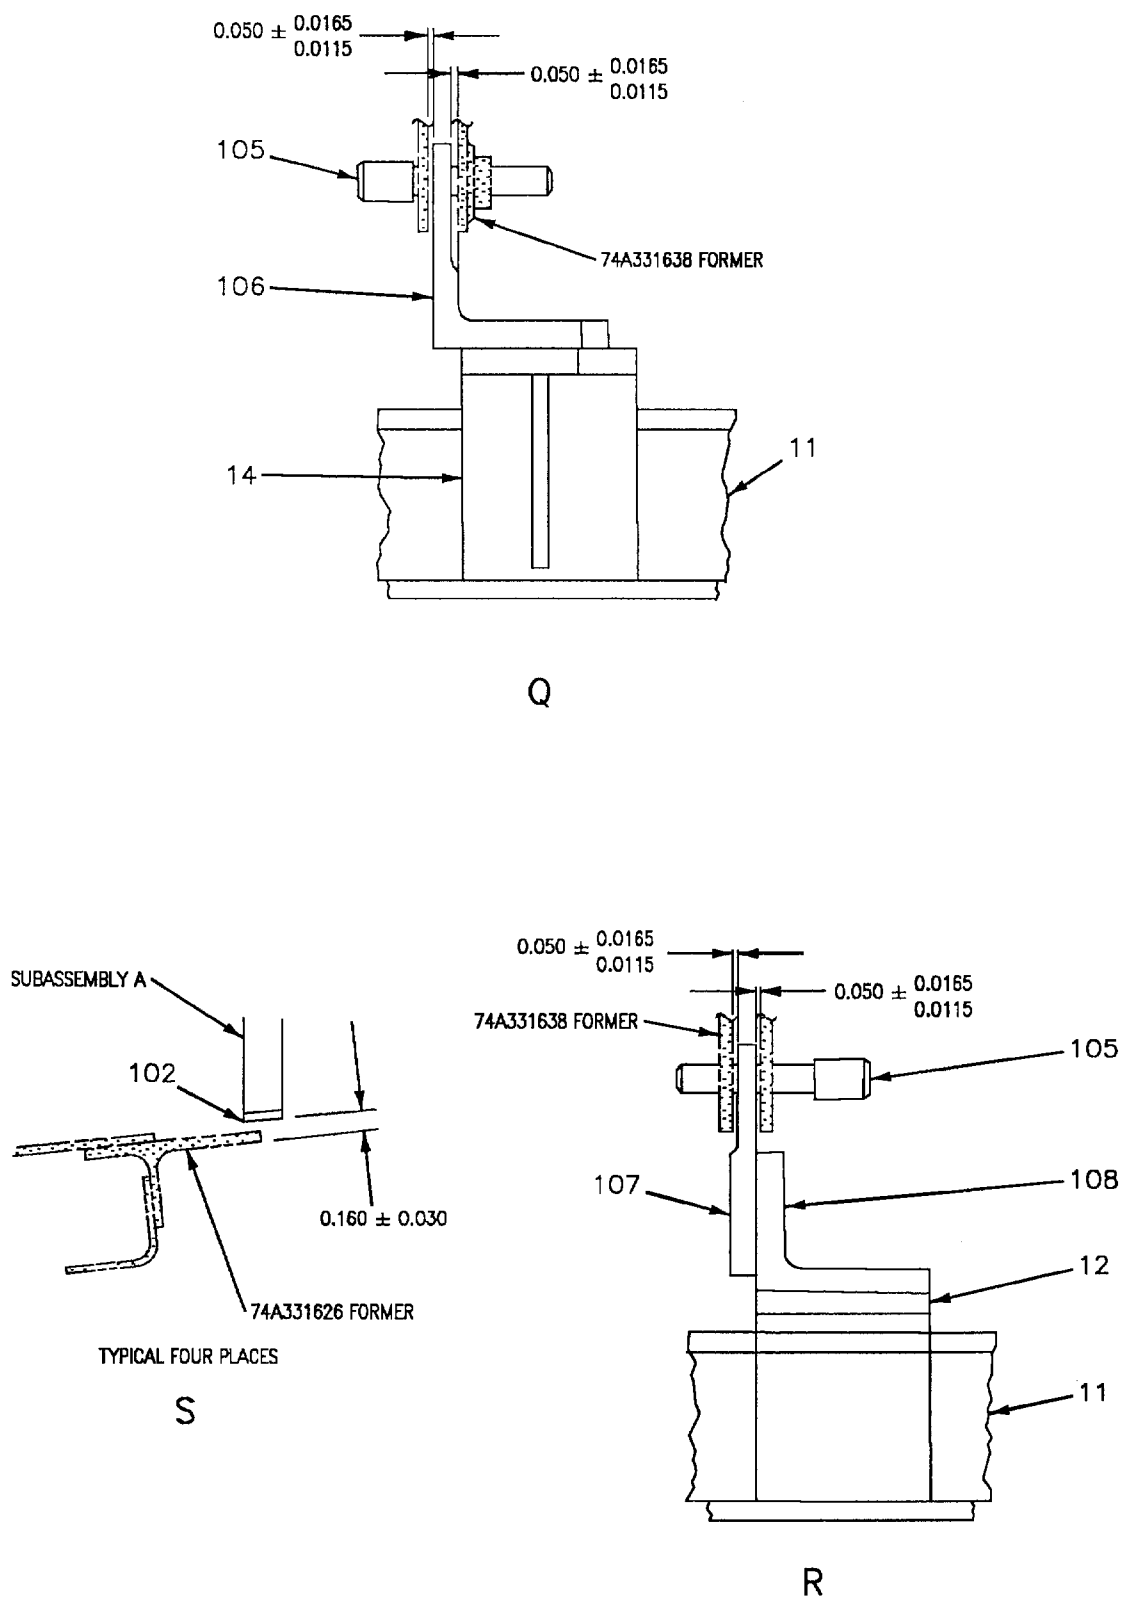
Maintenance Fixture RE174330621-1, -2 Details for Skin and Formers Replacement (Sheet 5)
